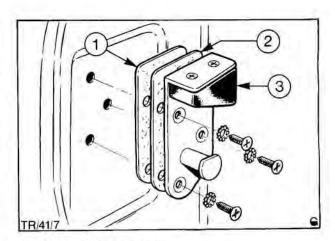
Floor striker assembly 1 and 2 – Shim 3 – Plate
